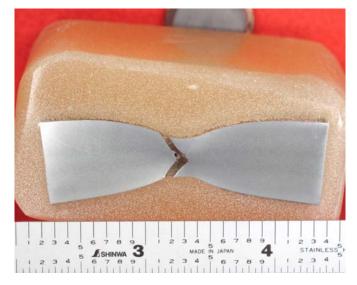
Cross-sectional view of the base pipe test sample after failure
